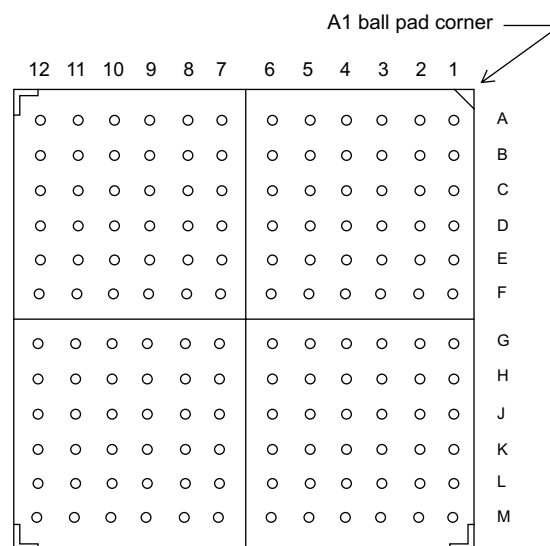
Bottom View of 144-Pin eZ80F91 BGA Device
